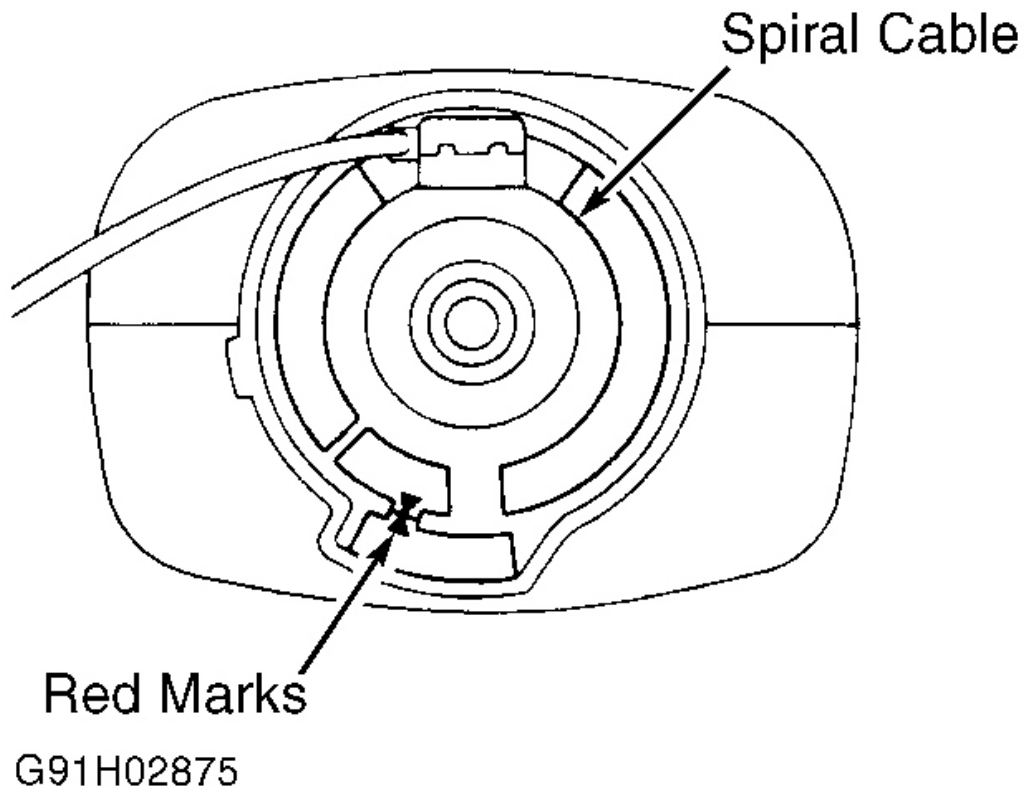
Adjusting Air Bag Spiral Cable (Typical)
